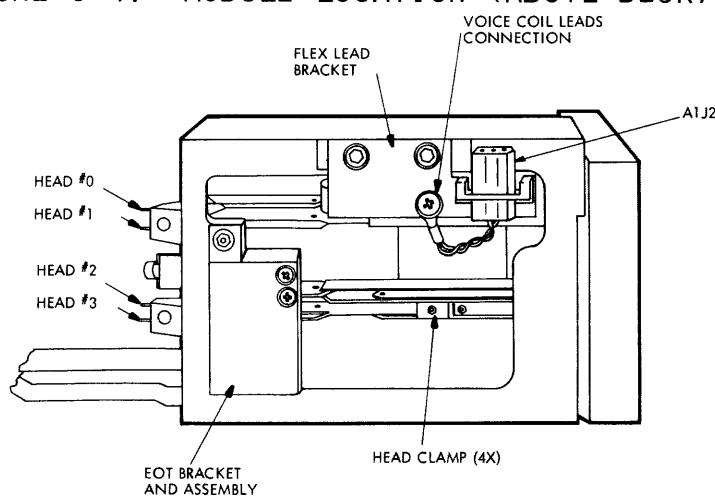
ACTUATOR ASSEMBLY-HEADS INSTALLED
